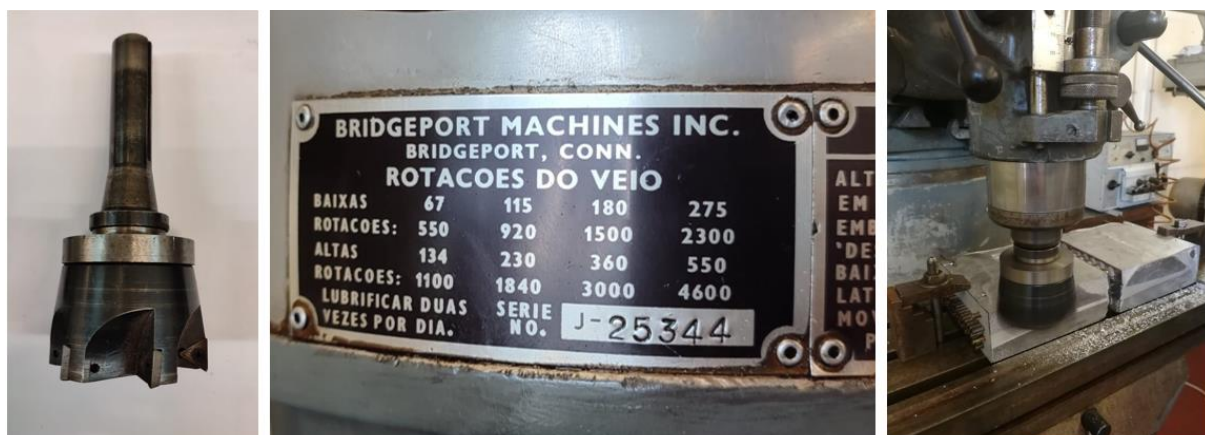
(a) 6 pad milling cutter tool, (b) milling machine manufacture spindle rotation speeds and (c) machining process of the HX
